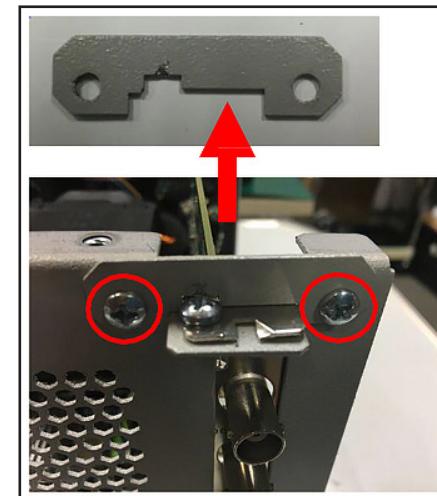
Metal Bracket Securing Digitizer Board in PC
